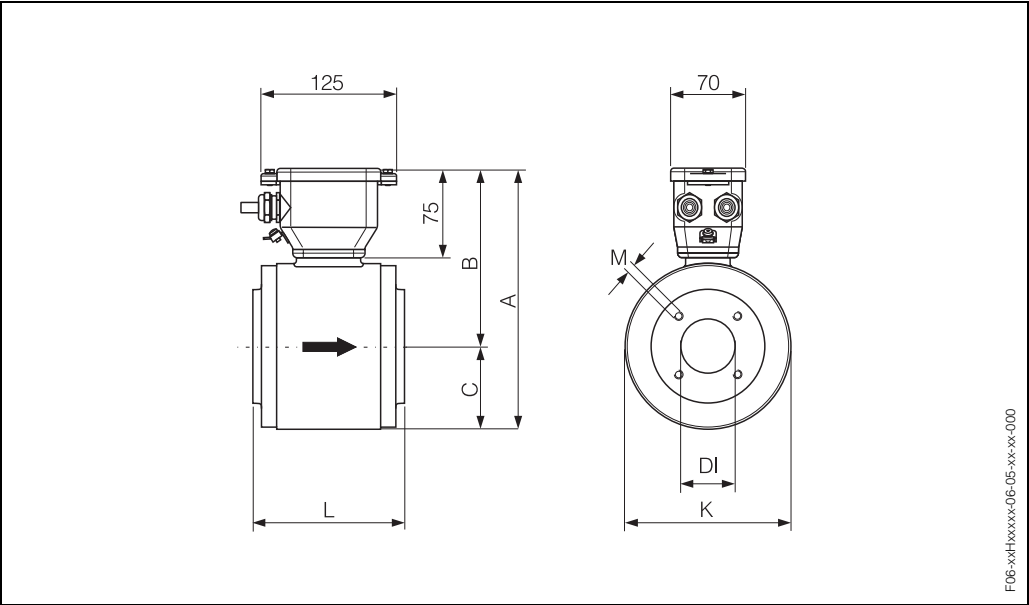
Dimensions Promag H / DN 40...100 (remote version)
